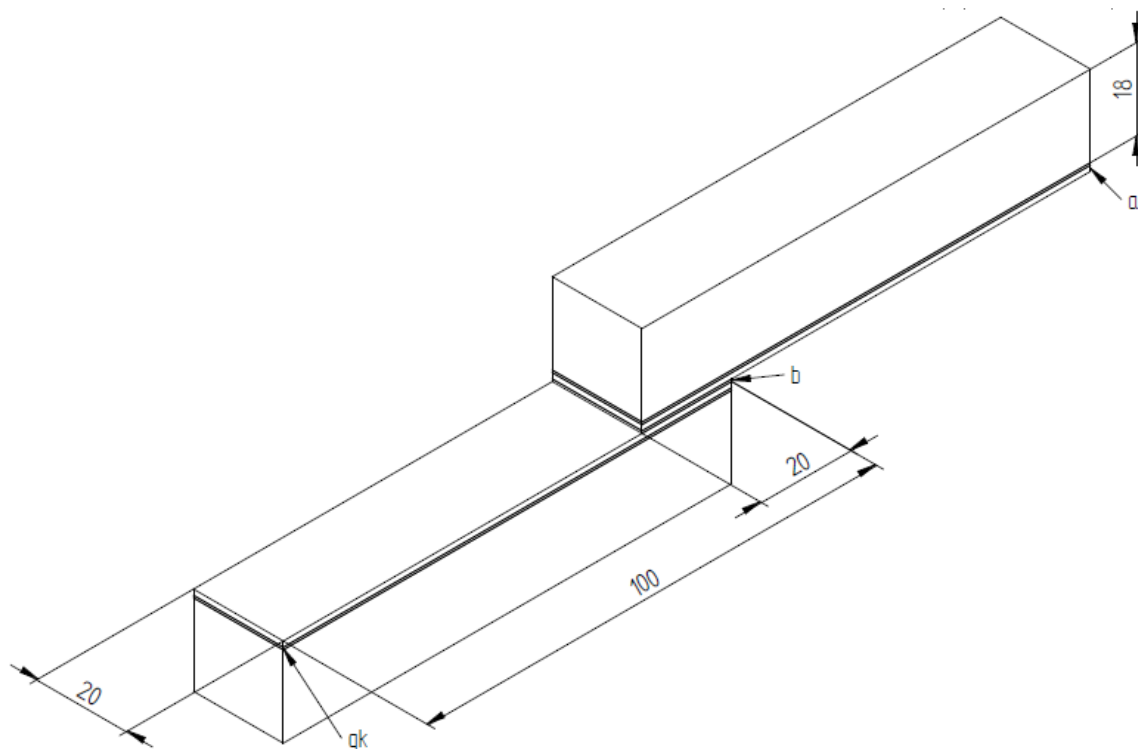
A single-lap adhesive joint scheme: a – furniture film thickness, b – epoxy adhesive thickness
